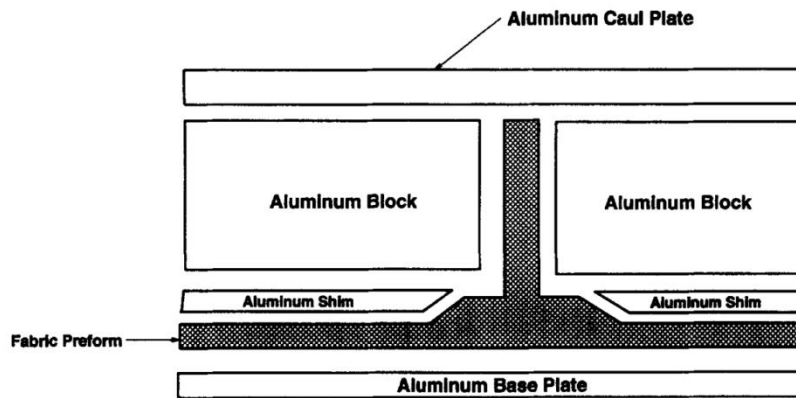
Exploded view of a blade-stiffened panel [61]
